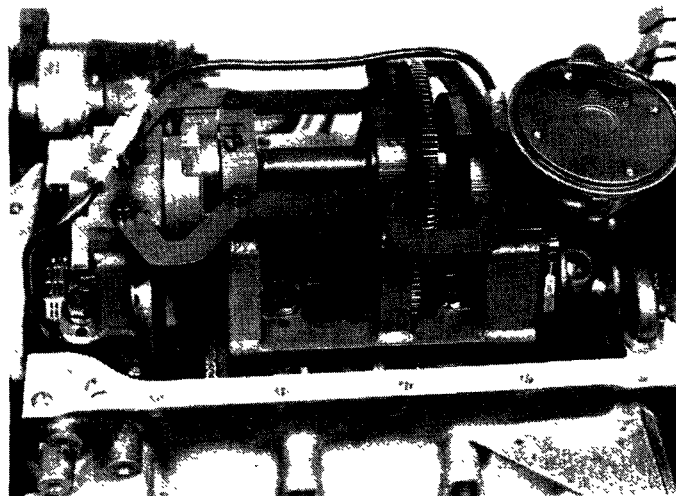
Oldham-Coupling Balancer Installed on 3.1L 90° V6 Engine.
